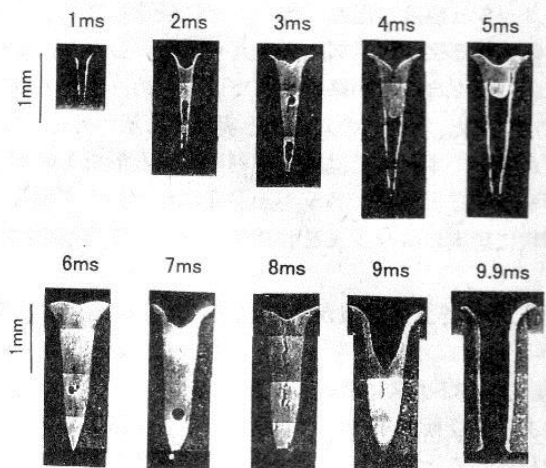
Cross sections of processed holes with increase of irradiation duration when steel is used as workpiece material
